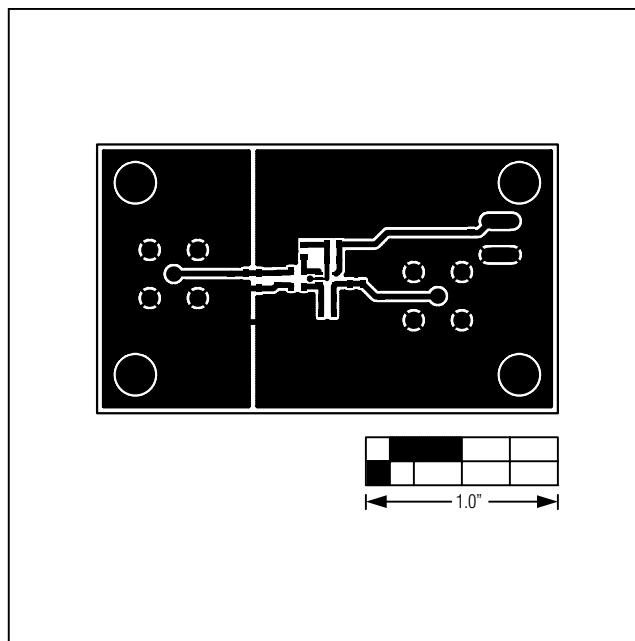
MAX9622 EV Kit PCB Layout—Component Side
